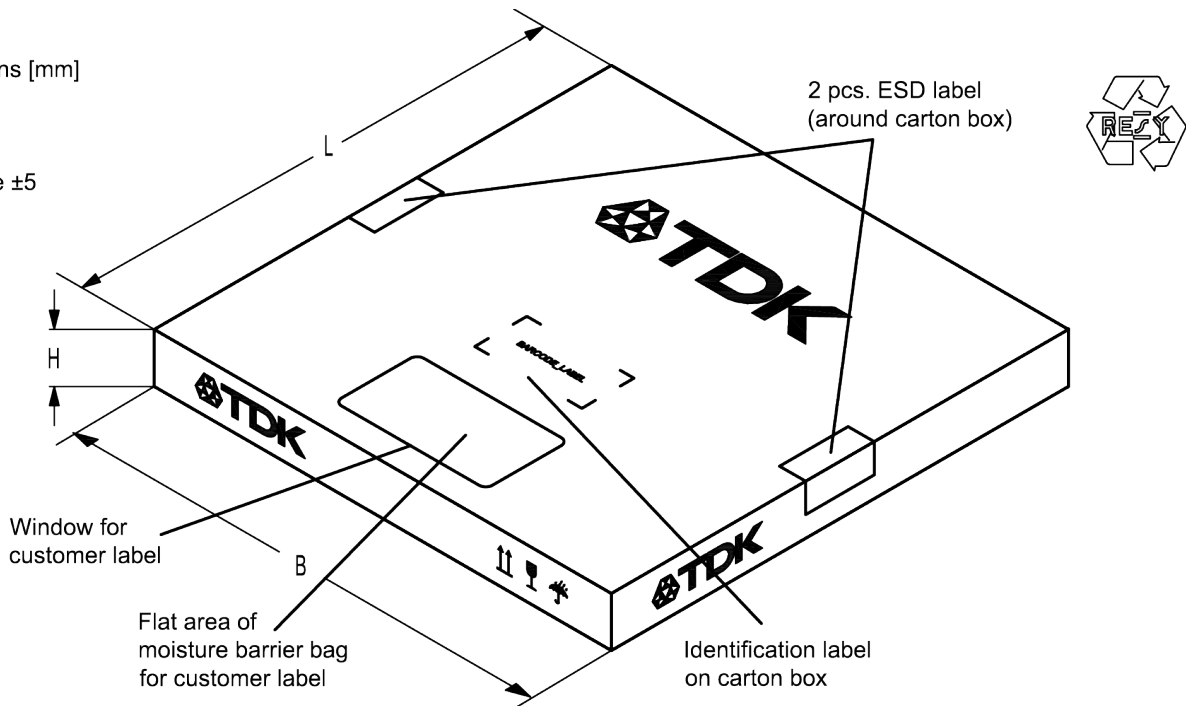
Drawing of folding box for reel with diameter of 180 mm.
